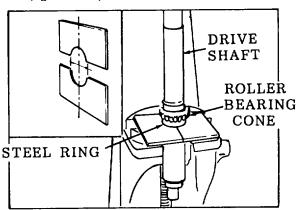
Placing Steel Ring Over End of the Shaft.
